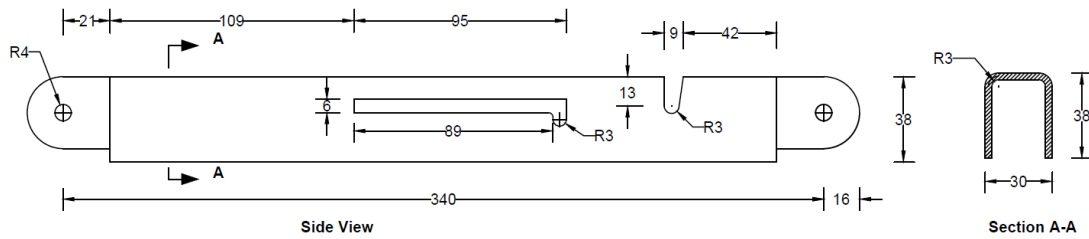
Details of primary folding link bars (all dimensions are in mm, steel plate gauge 11).
